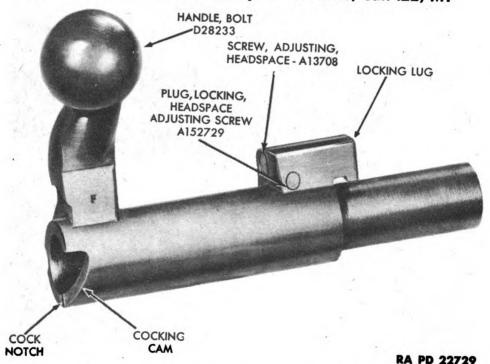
Bolt Handle Group of U.S. Rifle, Cal. .22, M2 — Side View
